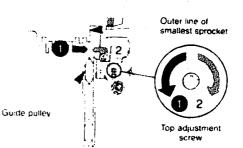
Adjust the high limit screw so the guide pulley aligns to the outside edge of the smallest cog.
